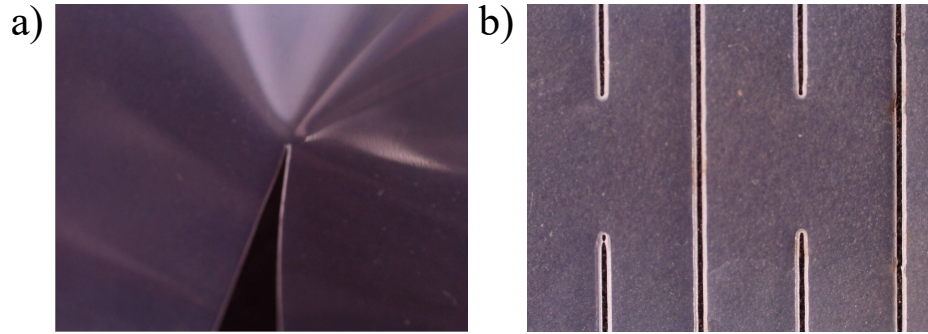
Zoomed views of slits on a mylar sheet (thickness $t = 100\mu\text{m}$). The cuts have been performed: a) by hand, and b) by a laser cutter machine.
